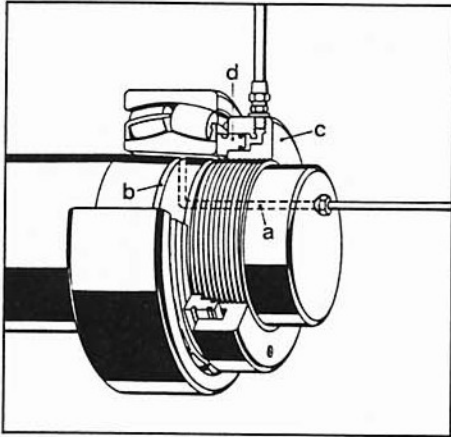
Hydraulic tools—mounting a spherical roller bearing on a tapered journal
